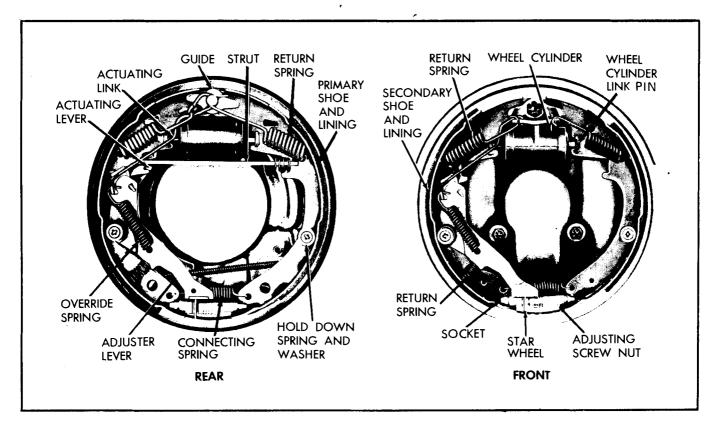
Typical Right Hand Self-Adjusting Brake Assemblies
